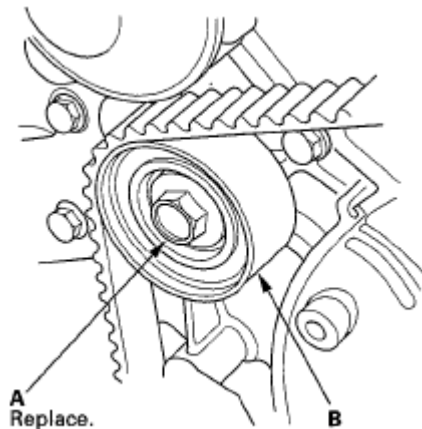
Identifying Idler Pulley Bolt And Idler Pulley
